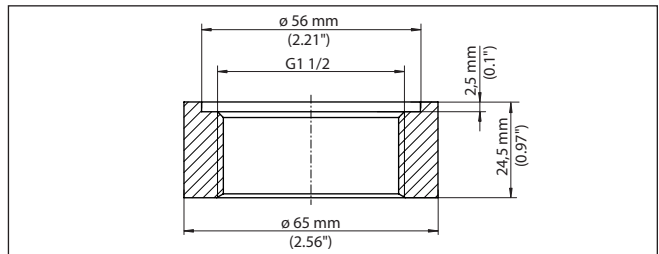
Dimensions of welded socket, thread G1½ (EN 837) - VEGABAR 82, 83, 86, 87
